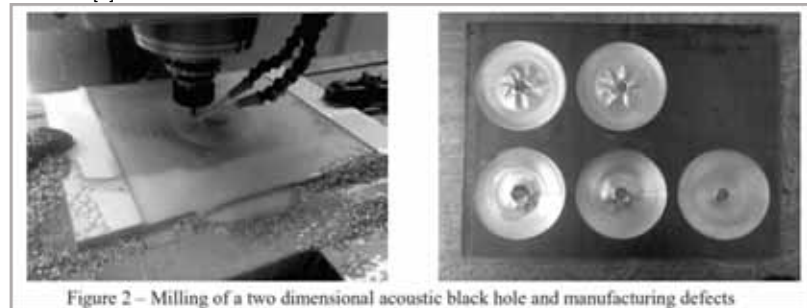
Milling of a two dimensional acoustic black hole and manufacturing defects
